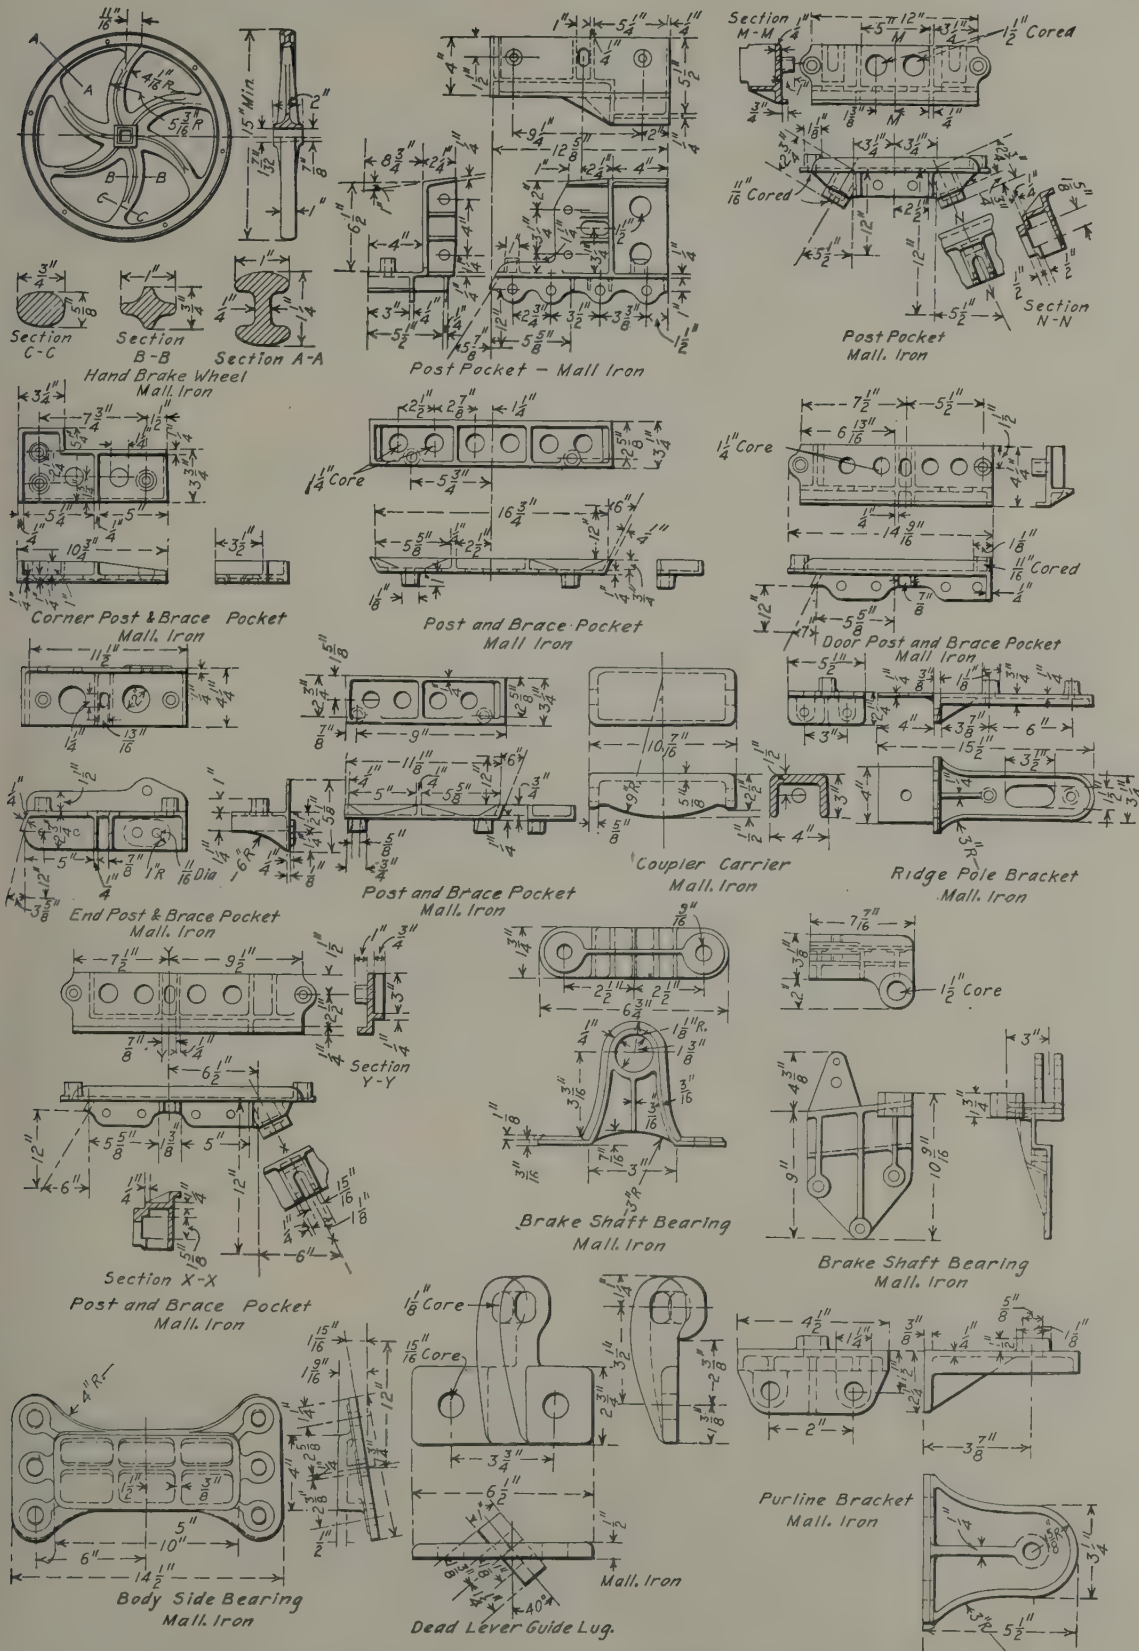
Details Used on New York Central Steel Underframe Box Car.
